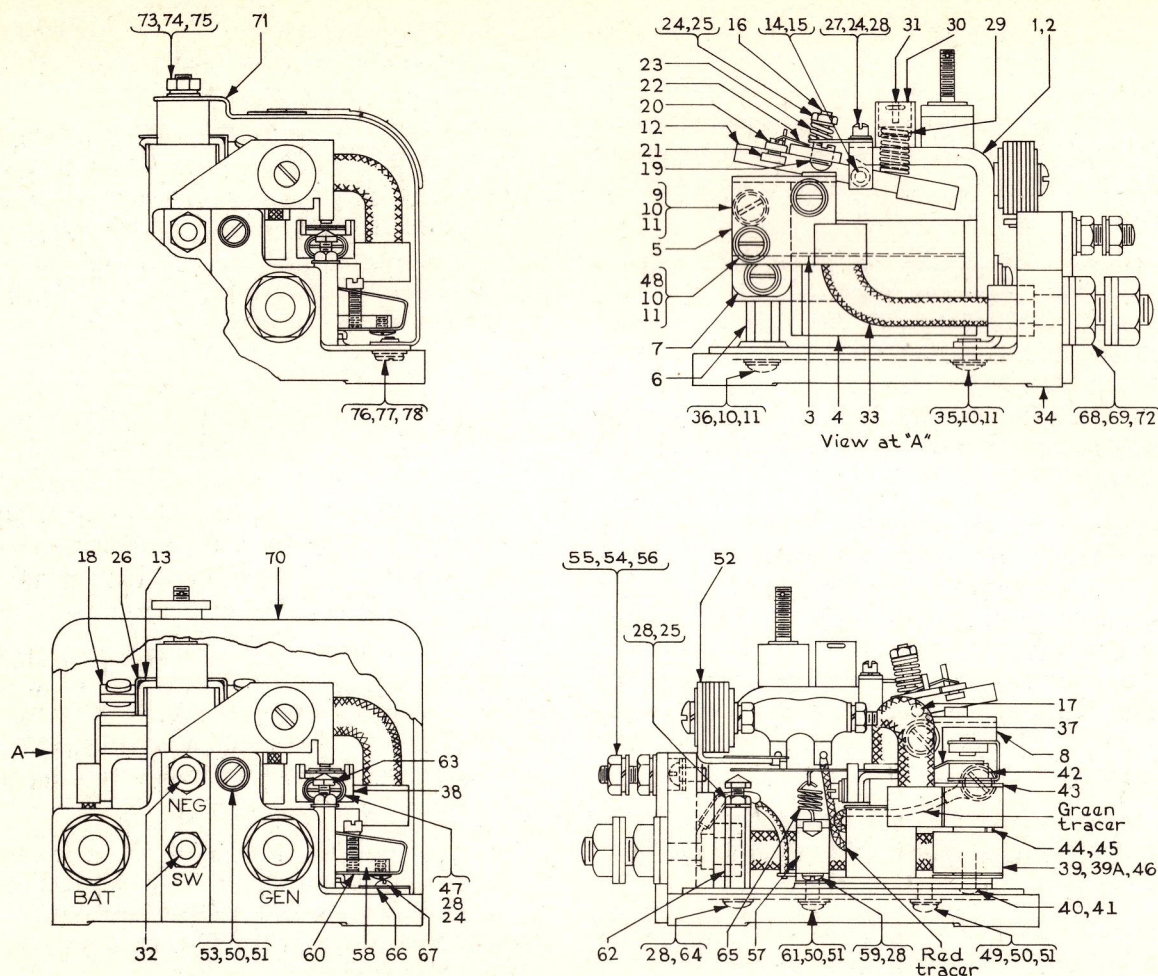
Assembly of relays, Model No. 3GTR72A1 and 3GTR72A1A
